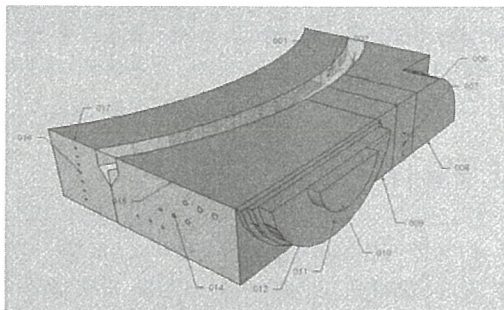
S-scan Calibration Block design for Phased Array UT to inspect Canister Lid-weld.
